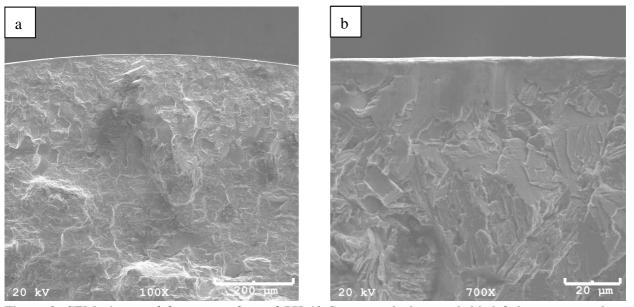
SEM photos of fracture surface of PH-42 Supra steel plasma nitrided fatigue test specimen in rotating bending test: a) rupture by brittle fracture and b) detail of fatigue crack growth at specimen surface.
